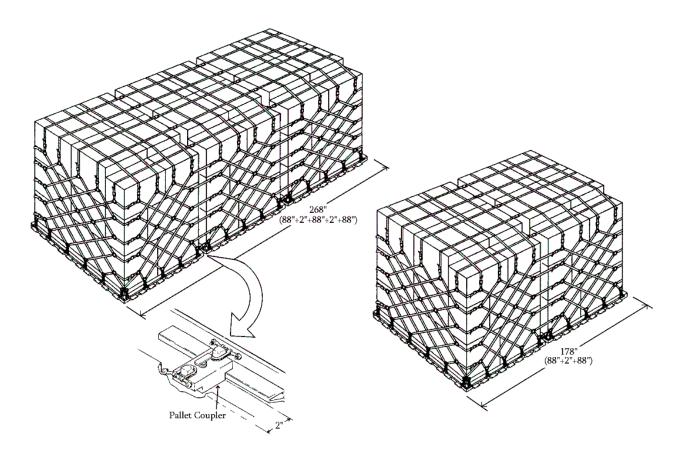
Double and Triple married pallet loads with detail of pallet coupler.
